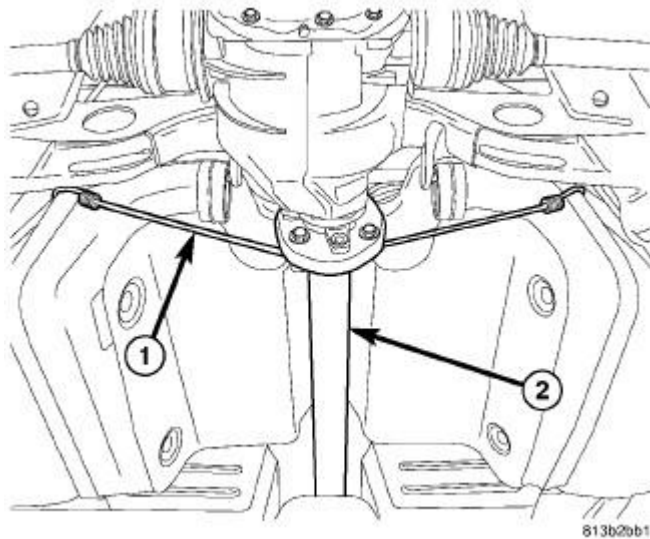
PROP SHAFT SUPPORT BY BUNGEE CORD
